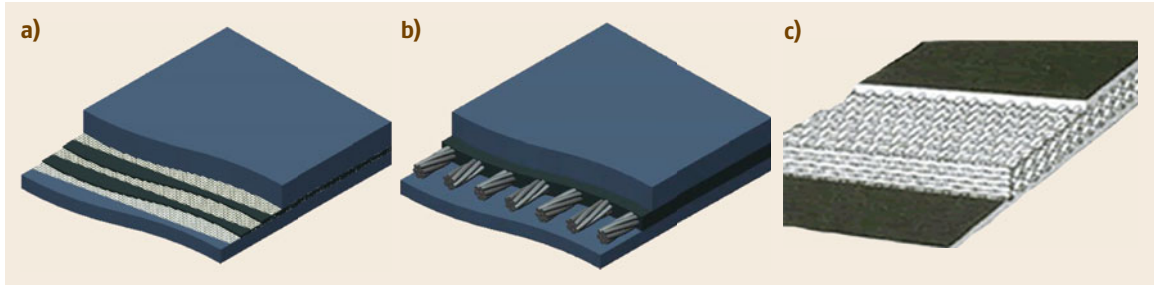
c Typical conveyor belt carcass constructions: (a) fabric ply conveyor belt, (b) steel cord conveyor belt, and (c) solid woven conveyor belt [20.97]
